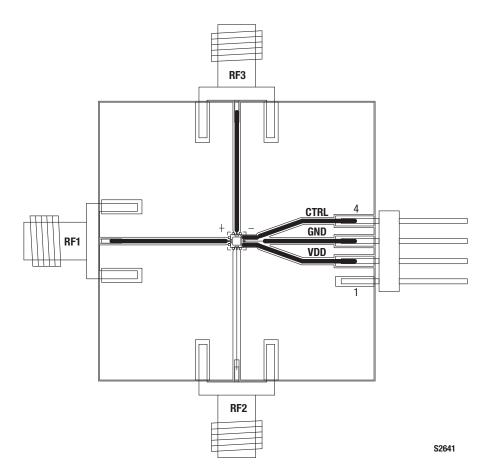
SKY13405-490LF Evaluation Board Assembly Diagram
